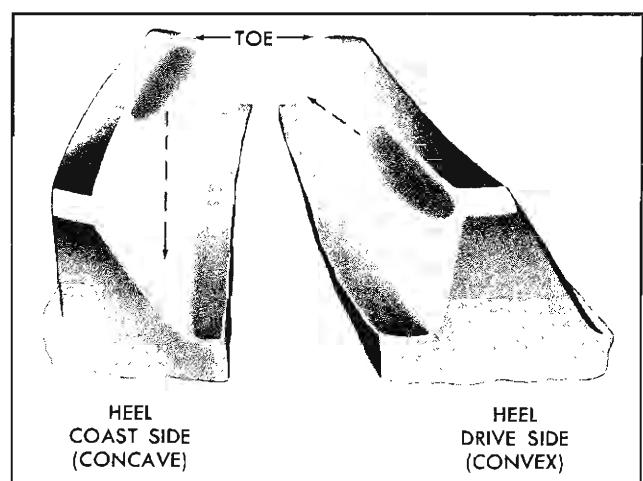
Direction of Tooth Contact Movement—Increasing Shim Pack
